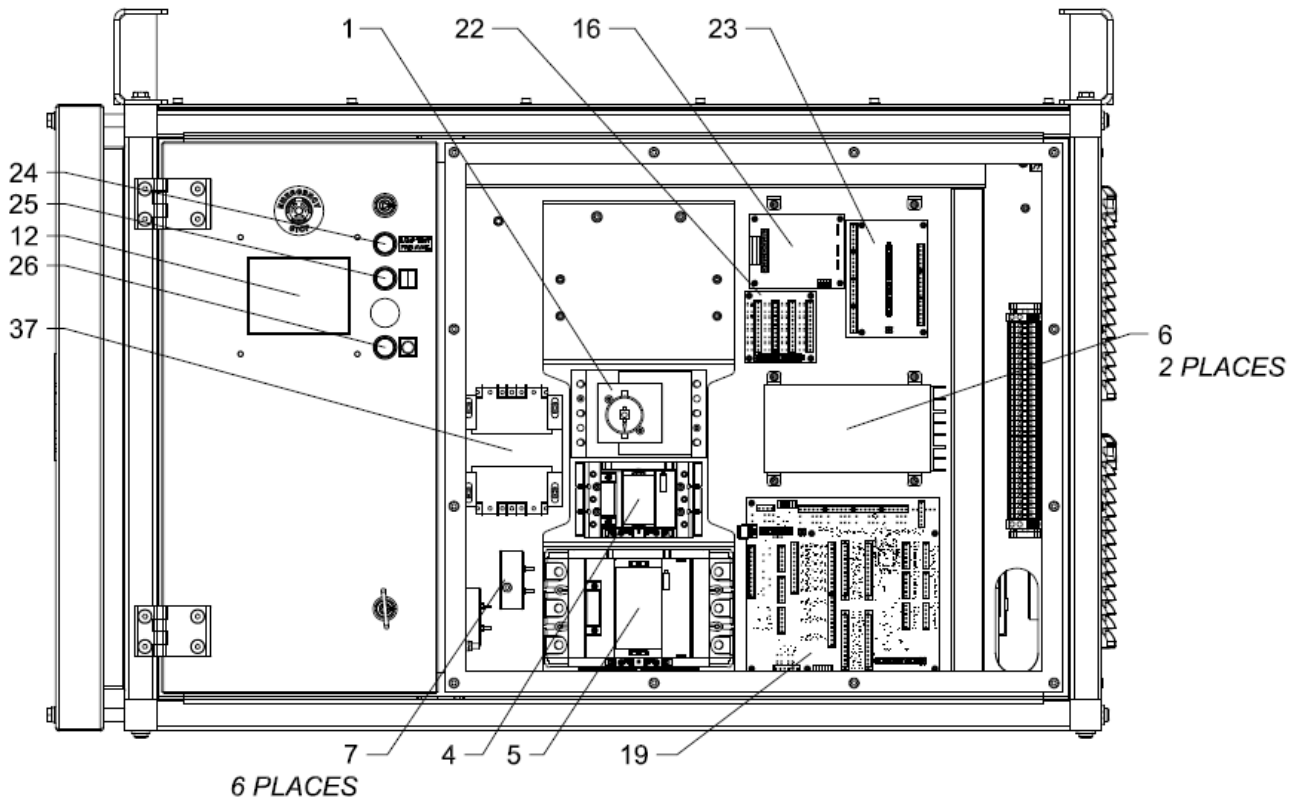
2500+ GPU Illustrated Parts List, Customer Interface Zone
